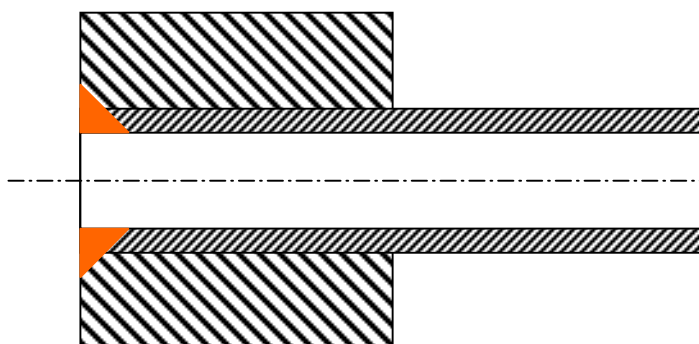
Node weld tube plate with the pipe Ø 16 x 3 (2,5) heat exchanger .
